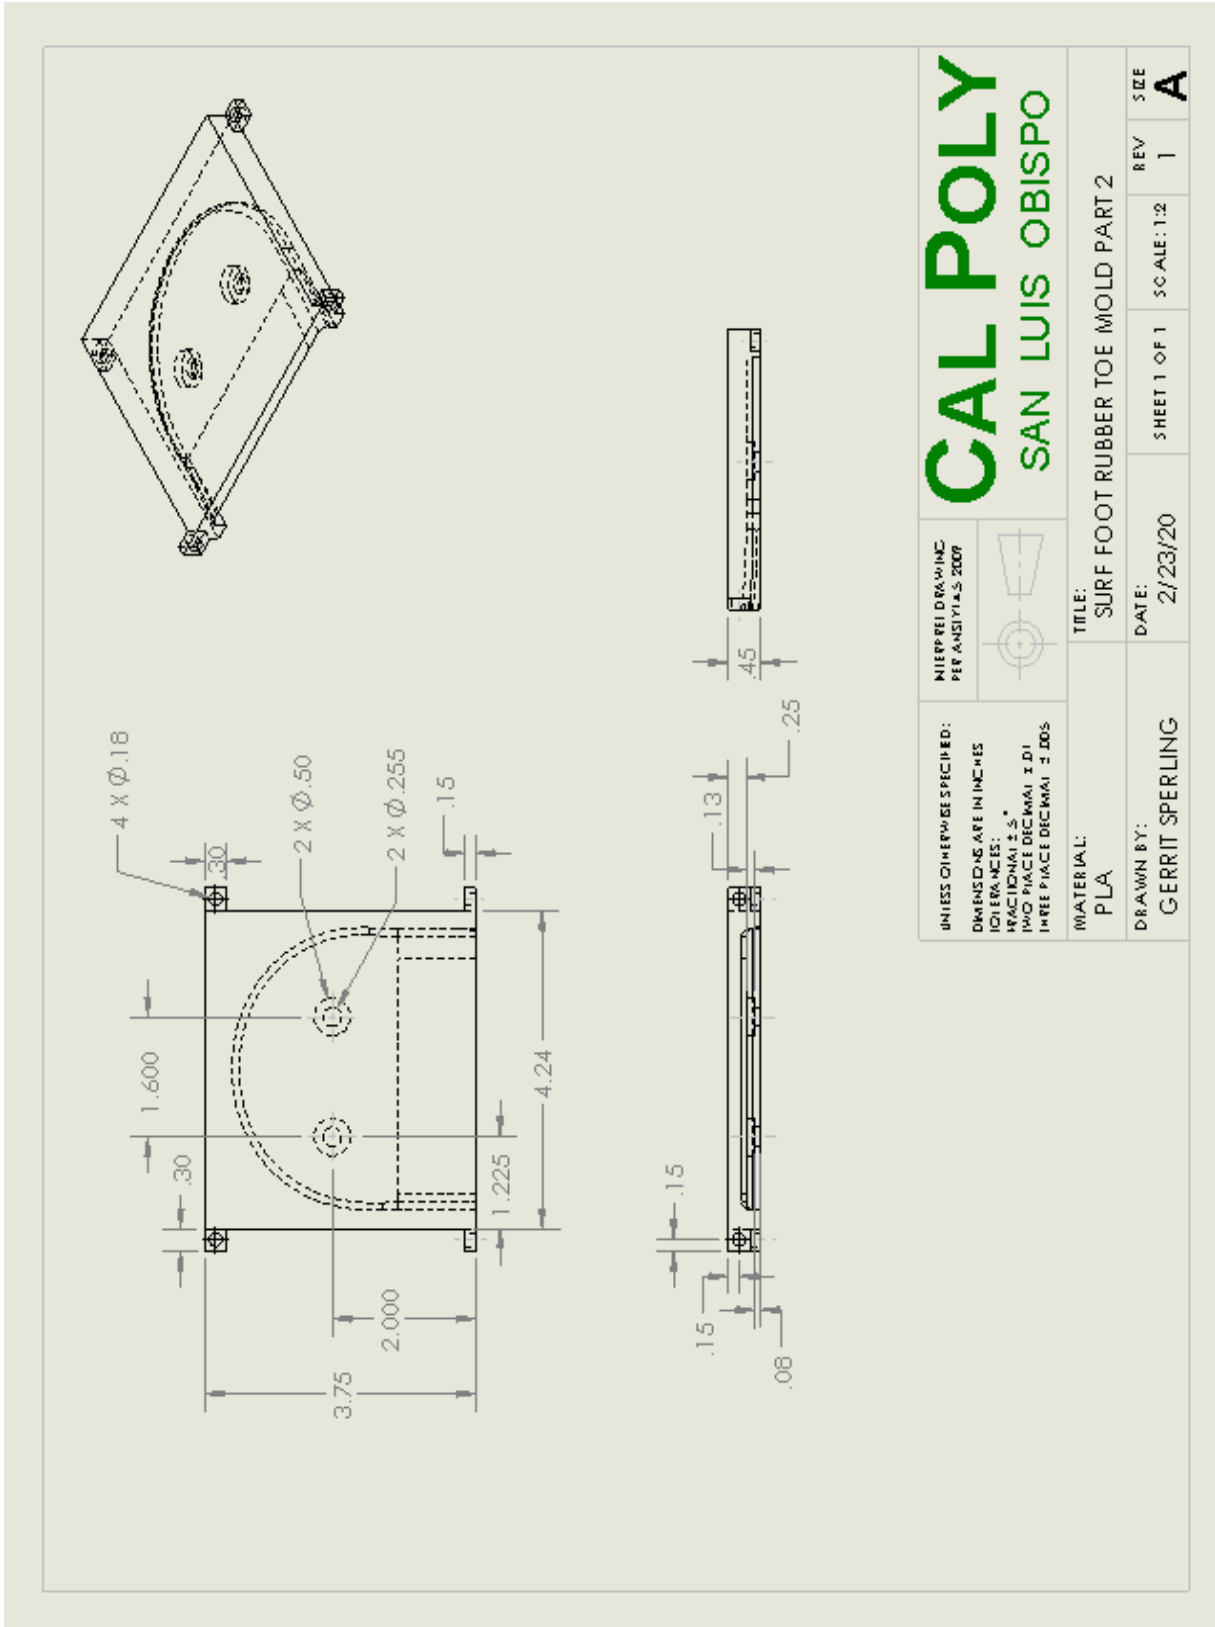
Detailed Drawing of Top Outer Mold for Rubber Toe
